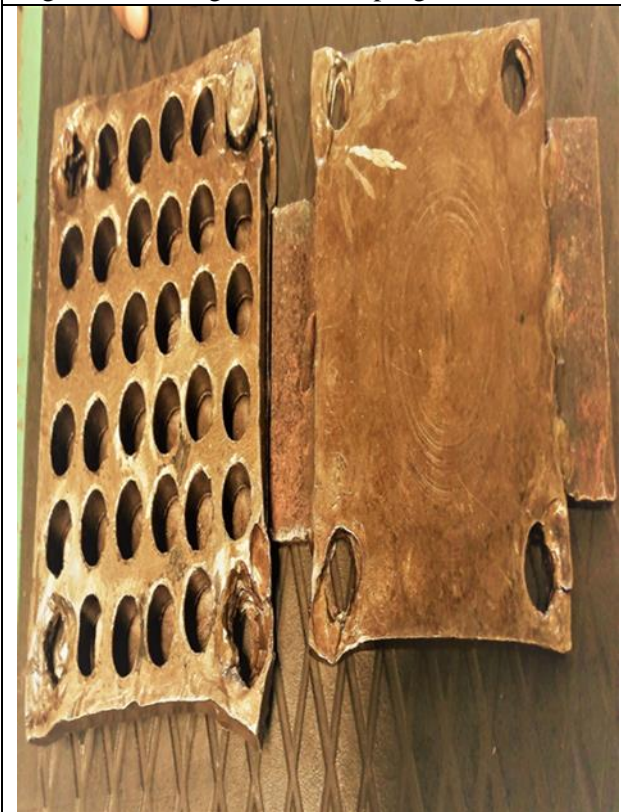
Mold of Specimen for Abrasion Test and Compression Test
